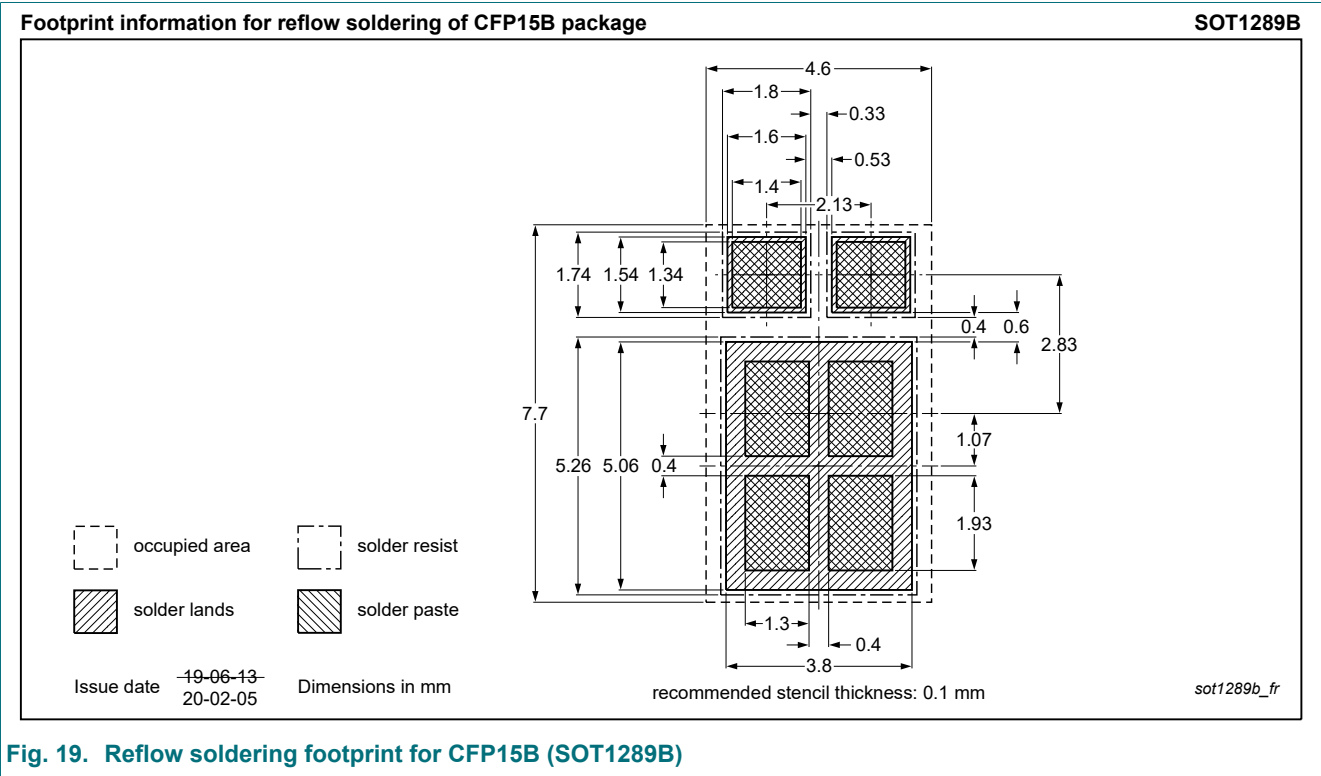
Reflow soldering footprint for CFP15B (SOT1289B)
